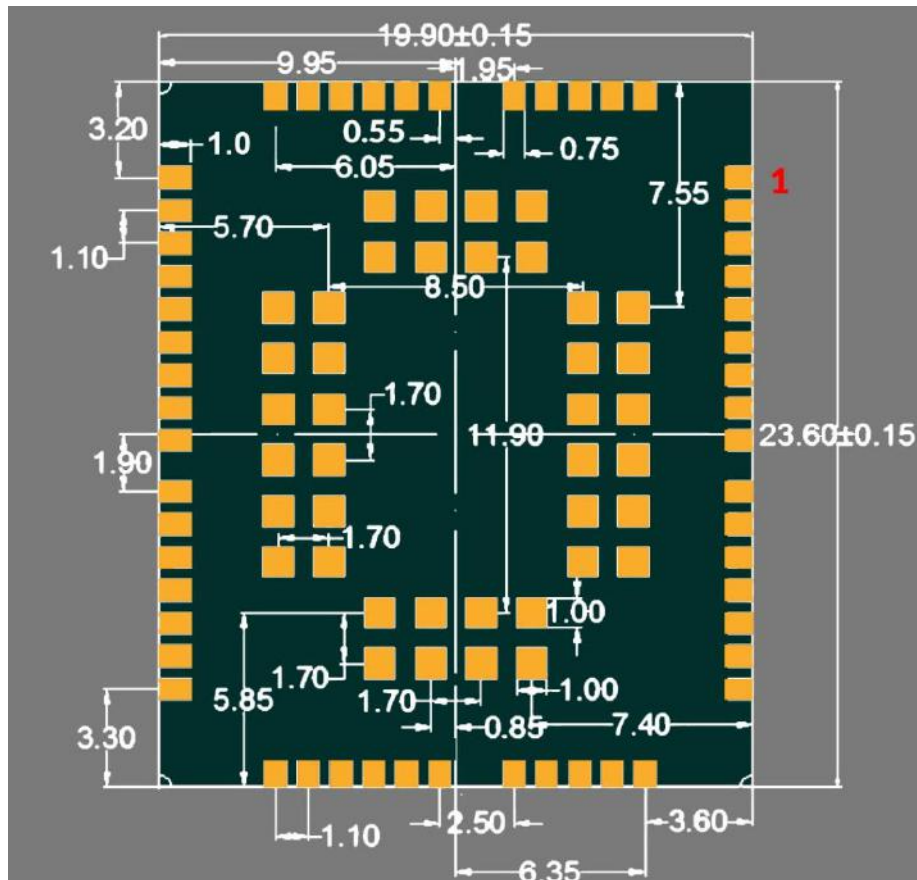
C1-RM NBIOT/EGPRS module bottom view (unit MM)
